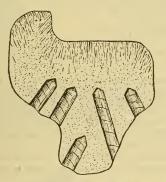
CHILL FOR CAR WHEEL AND METHOD OF TESTING.
